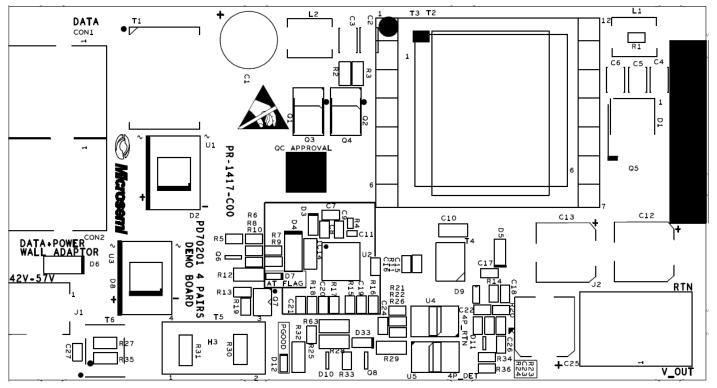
PD70201EVB60F12 EVB PCB Top
